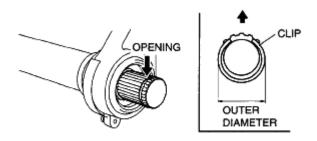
Separating Right Side Drive Shaft Courtesy of MAZDA MOTORS CORP.
